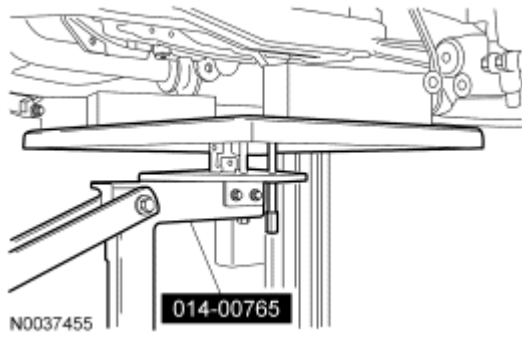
Positioning Special Tool (014-00765) Under Subframe Assembly
